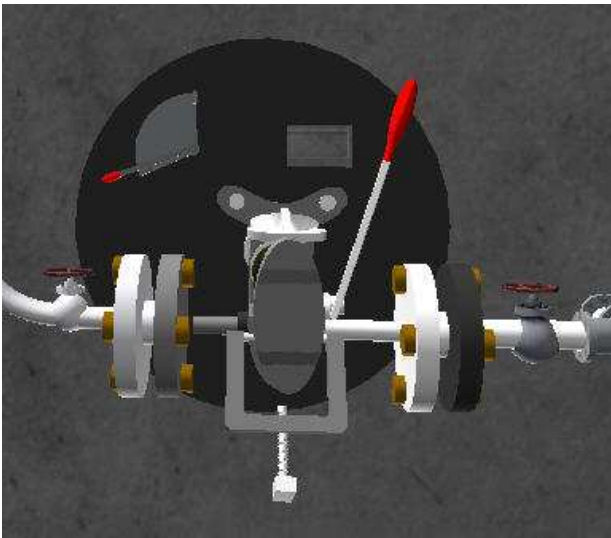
Clamp in the down position, allowing removal of the burner assembly
